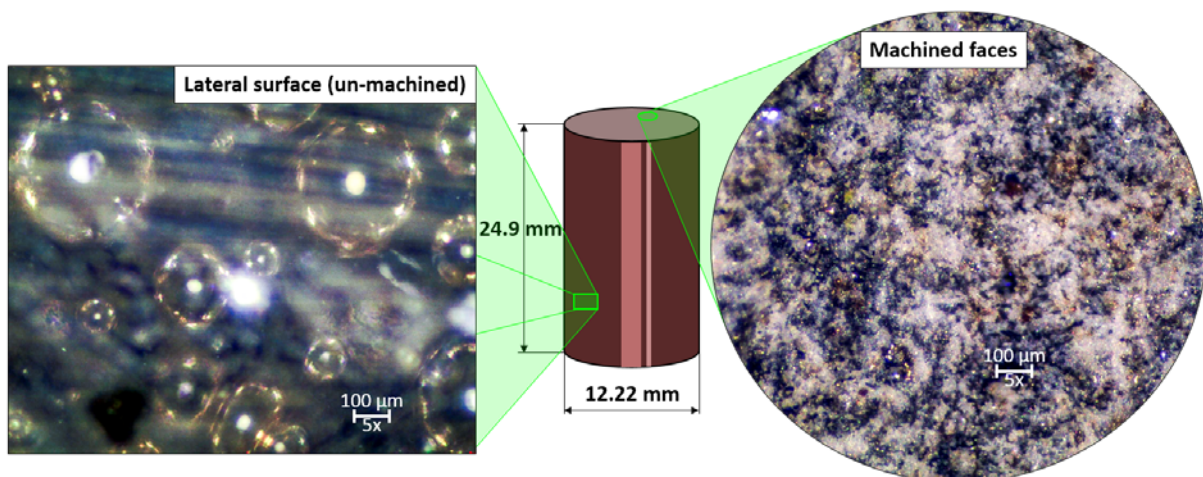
Size of the compression specimens and view of the surfaces under the microscope.
